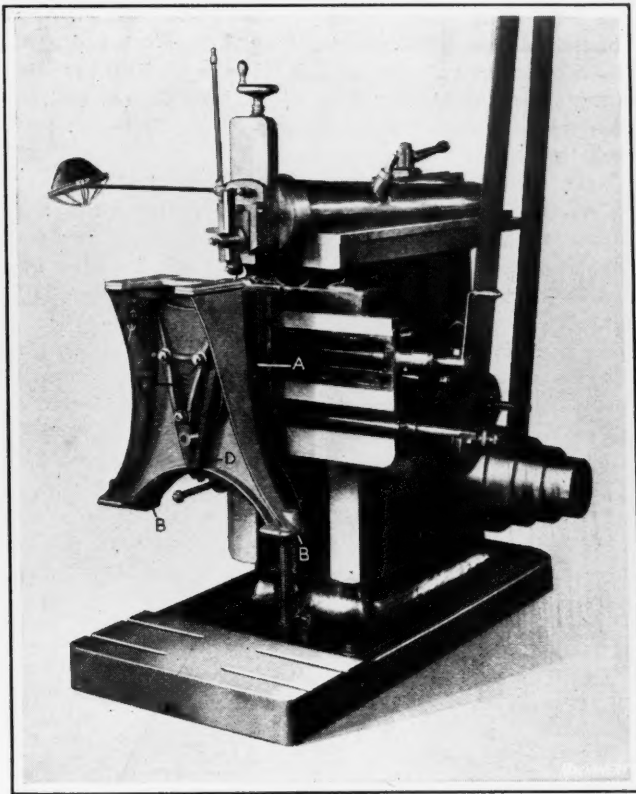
Shaper equipped for a Short Planing Operation on the Legs of an Engine Lathe
